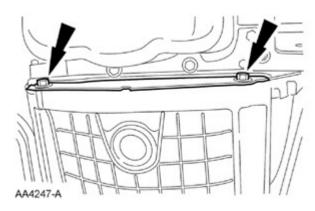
Locating Oil Cooler Courtesy of FORD MOTOR CO.
